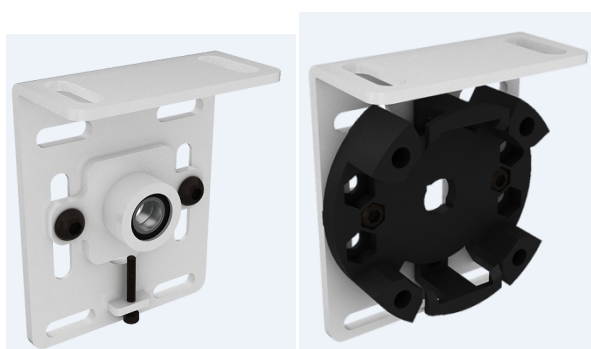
Motor bracket & Idler bearing holder- 90mm bracket
